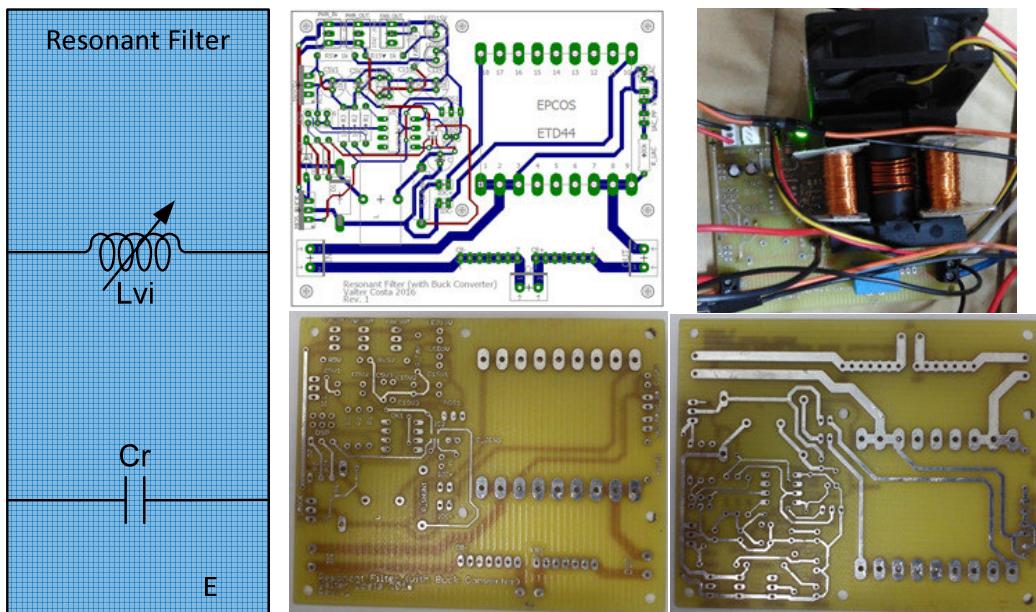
Resonant filter PCB prototype (100 x 80 mm), Board design; PCB Top and Bottom Layer and PCB full assembly
